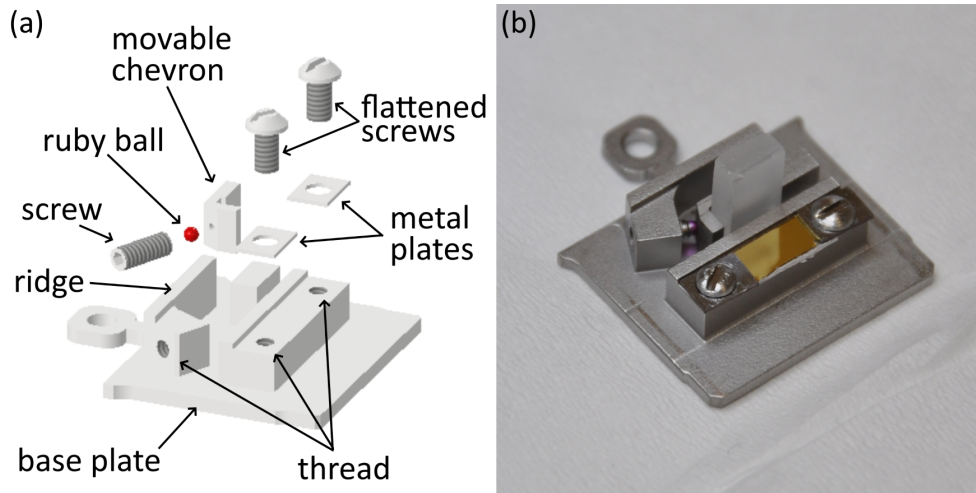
(a) Exploded-view drawing of the double sample holder (insulator and metal samples not shown). (b) Photographic picture of the double sample holder fabricated from stainless steel, a Au(111)/mica and calcite sample are mounted. The calcite crystal is uncleaved and, thus, protruding the sample holder.
